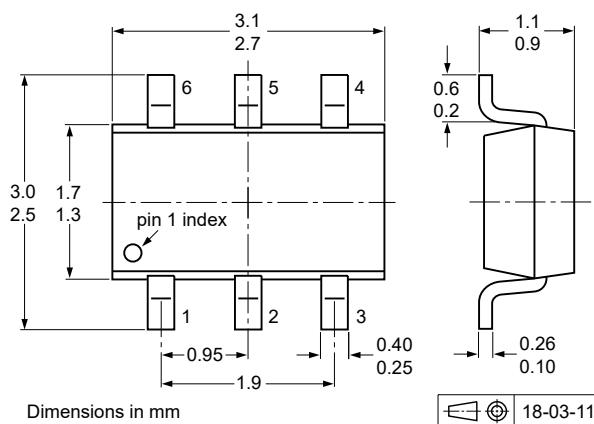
Package outline SC-74; TSOP6 (SOT457)
